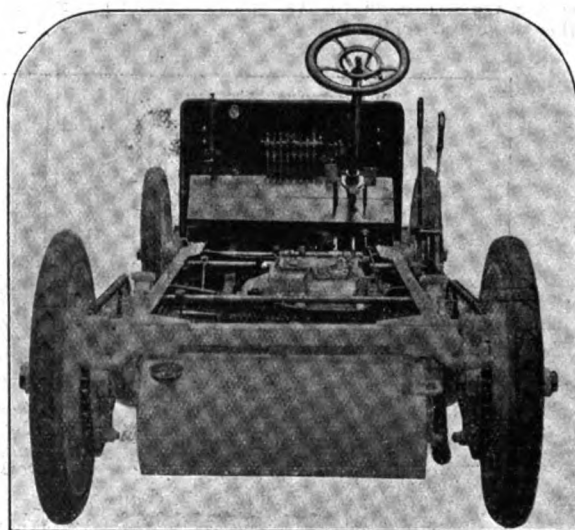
Rear View of Chassis of Daimler-Mercedes 35-h.p. Four-Cylinder Car.
